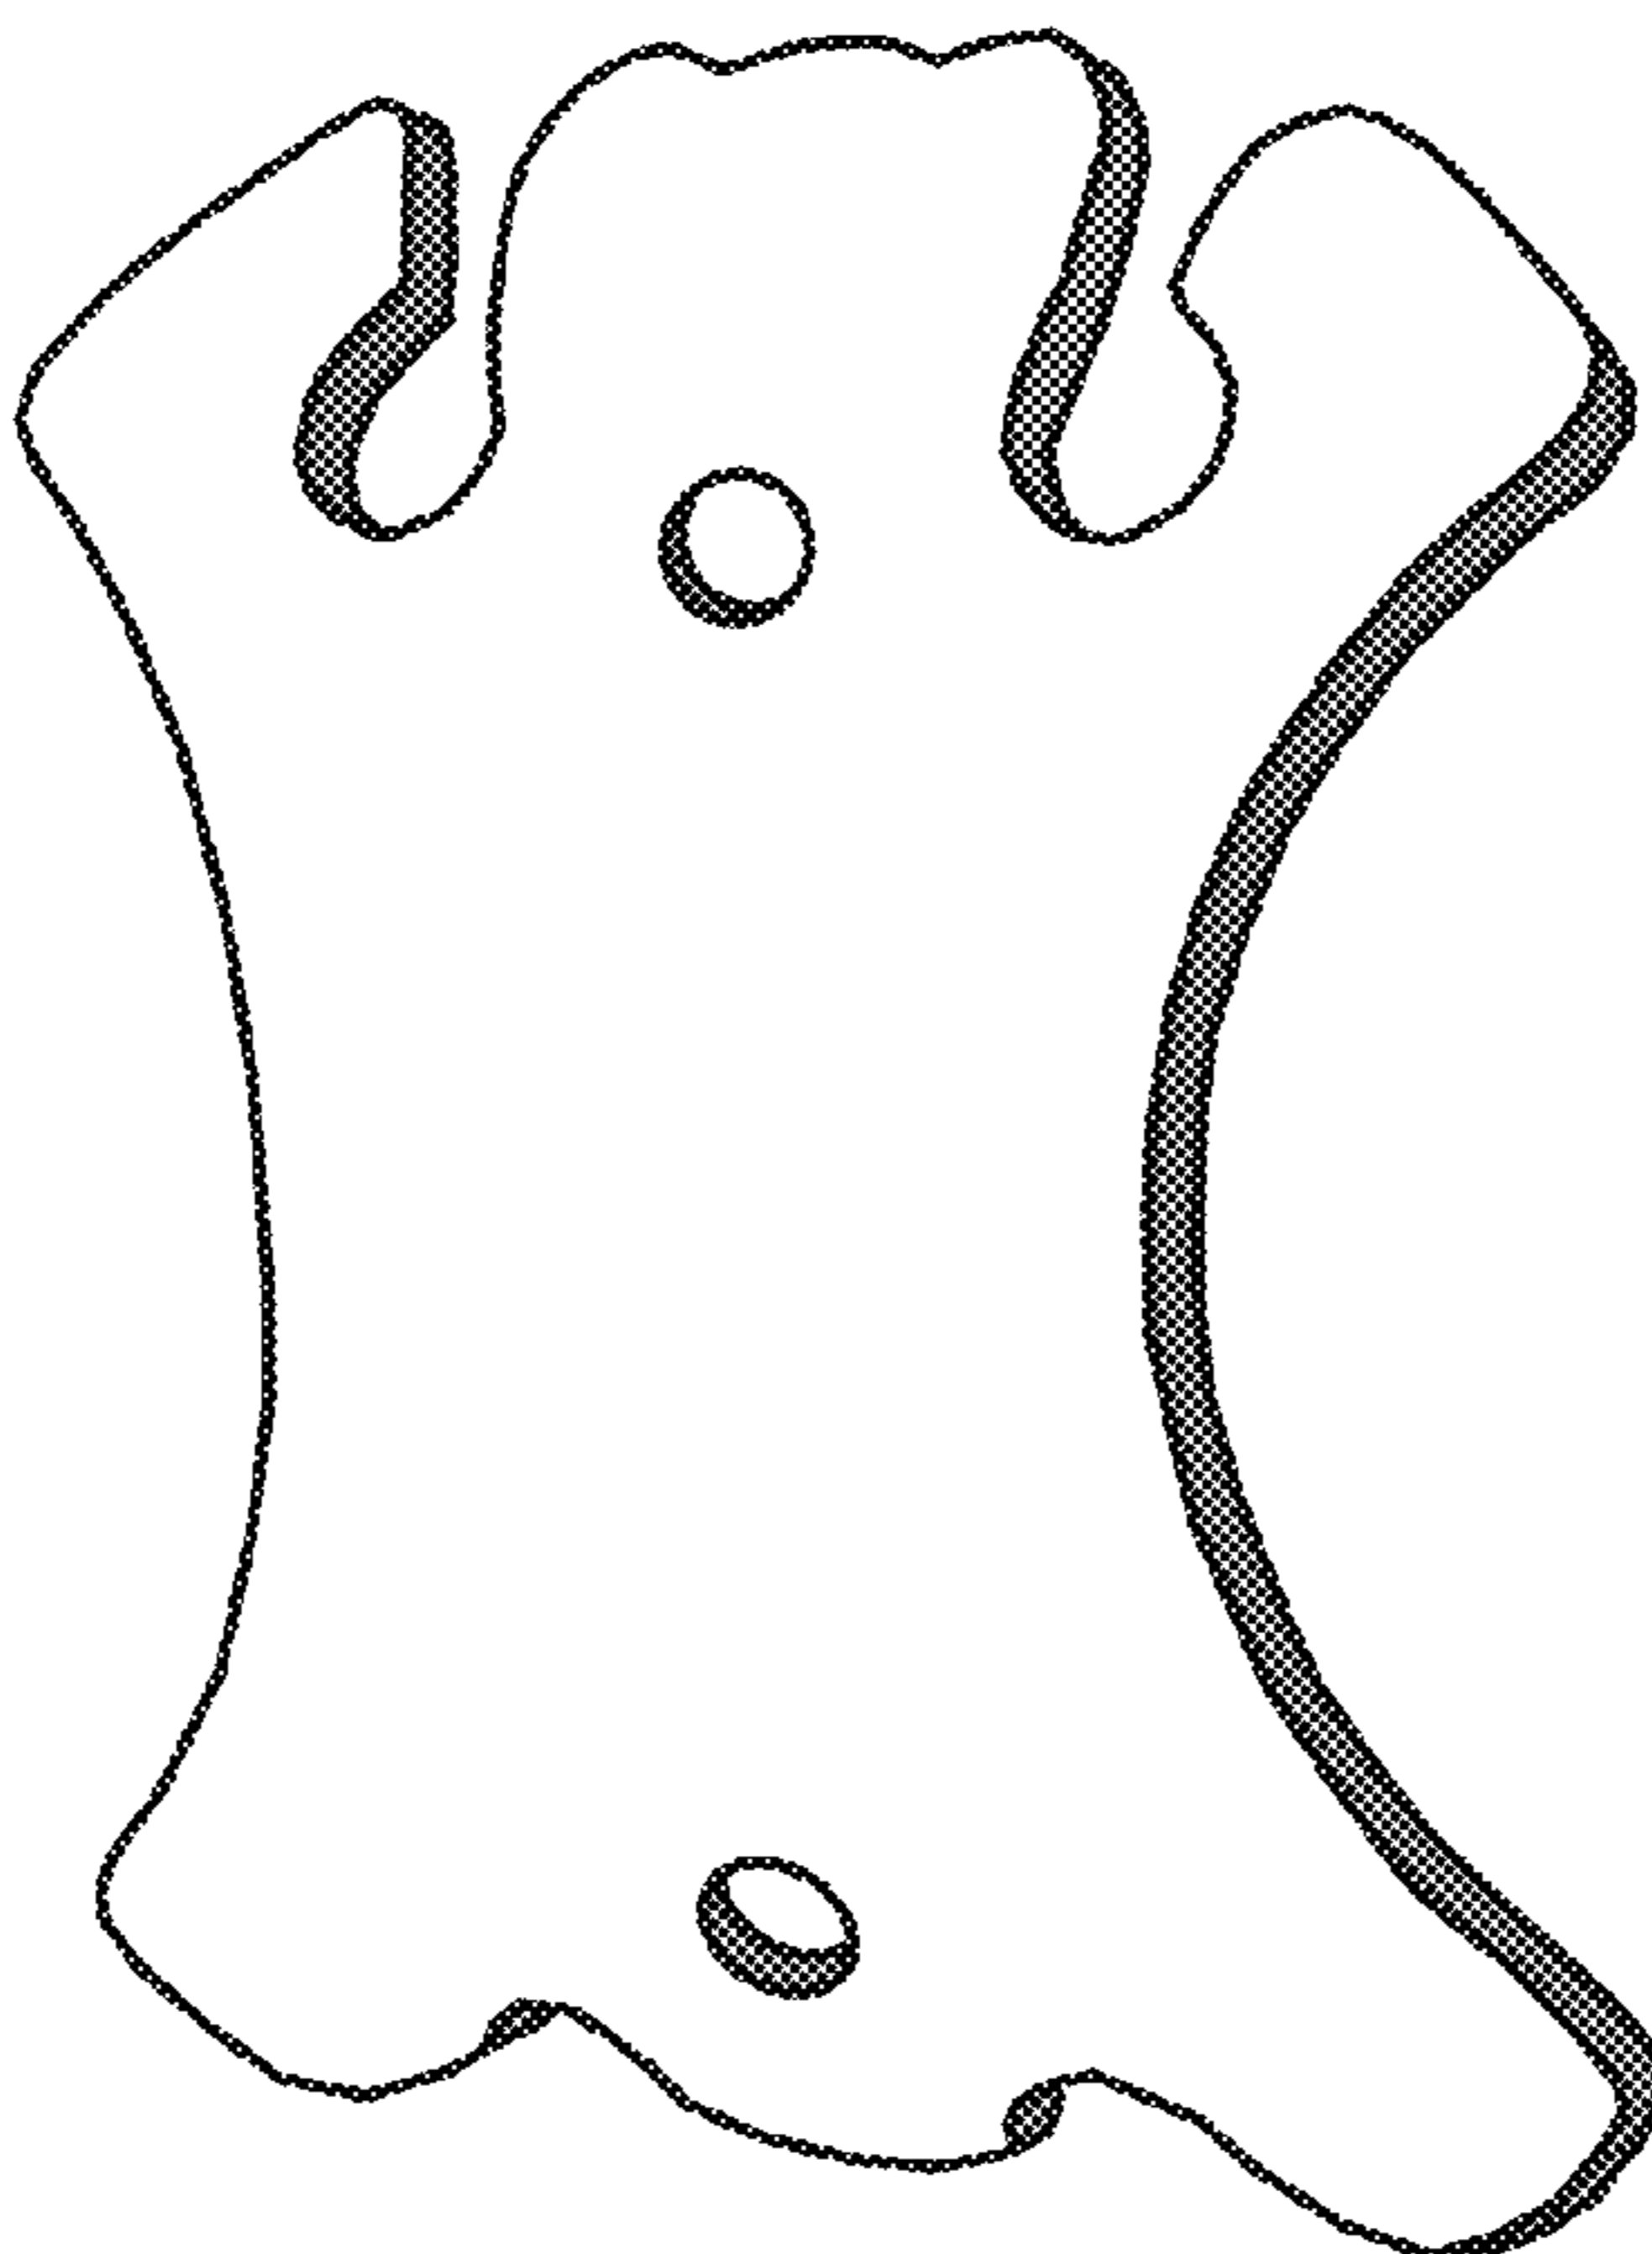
is a front elevational view of the cord tensioning device show in FIG. 1.
